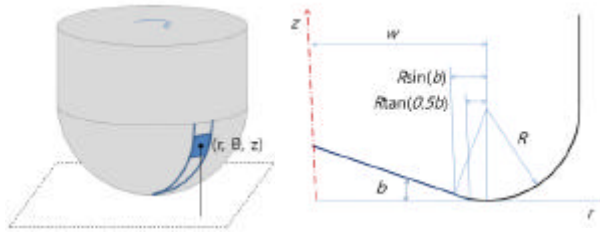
Updating the z-buffer using the facet element of the generalized end mill geometry
